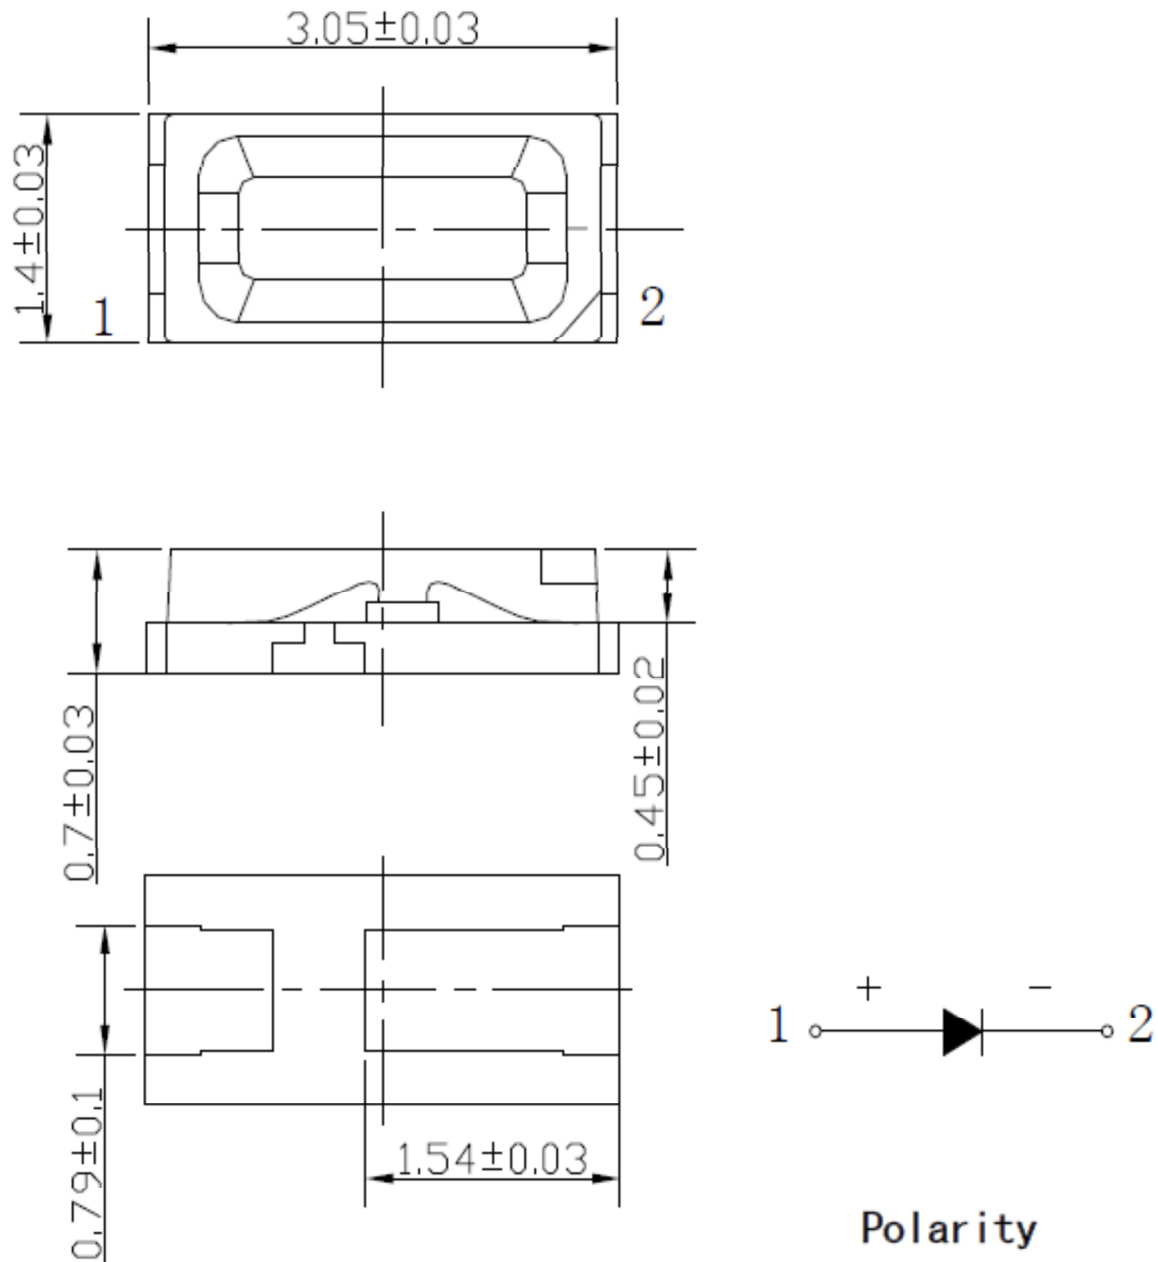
Mechanical drawings of the 3014 package (unit in mm)
